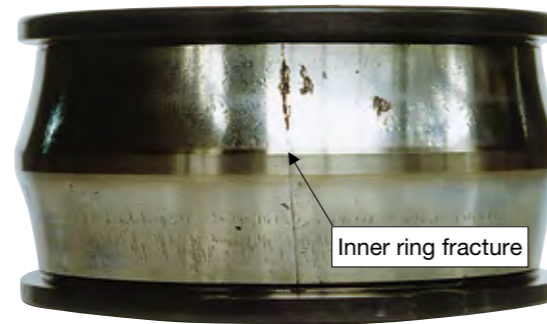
Inner ring fracture (spherical roller bearings)
